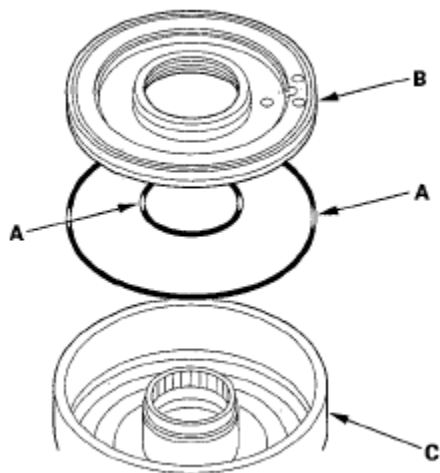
Identifying O-Rings, Clutch Piston And Clutch Drums
